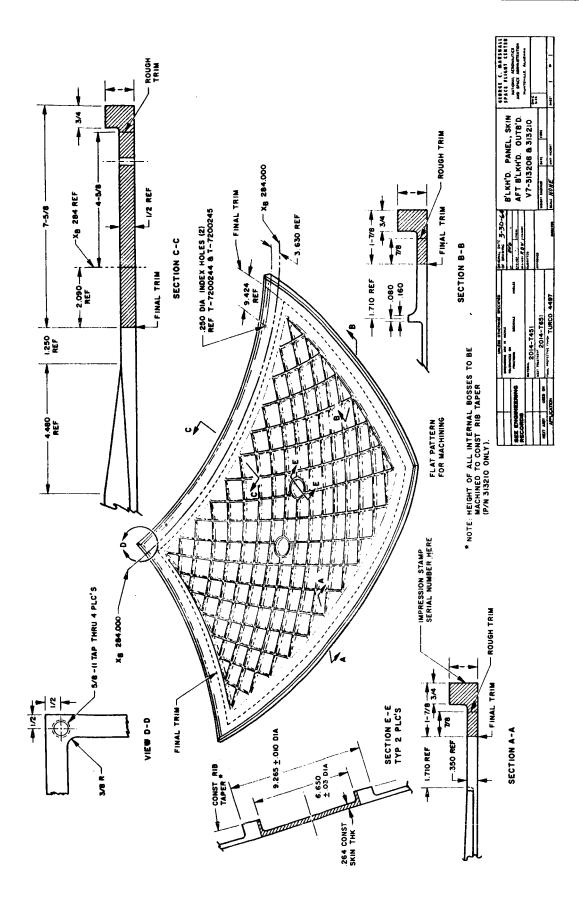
WAFFLE SEGMENT SHOWING BARRIER RIB
